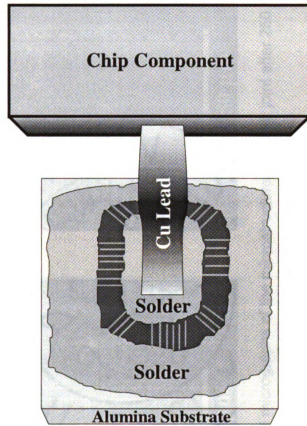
A schematic drawing showing the circumferential crack on the free surface of the solder joint and striations on the bottom surface in the open crack.
